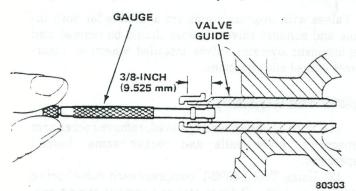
B-27 Measuring Valve Guide Bore with Telescoping Gauge
